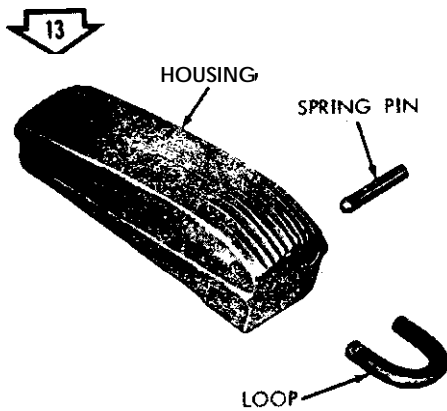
Disassembly/assembly of receiver group (3 of 7).
